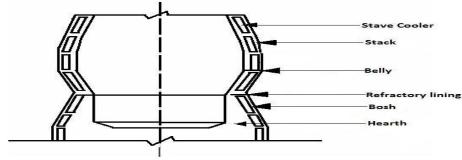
Arrangement of stave coolers in a Blast Furnace
